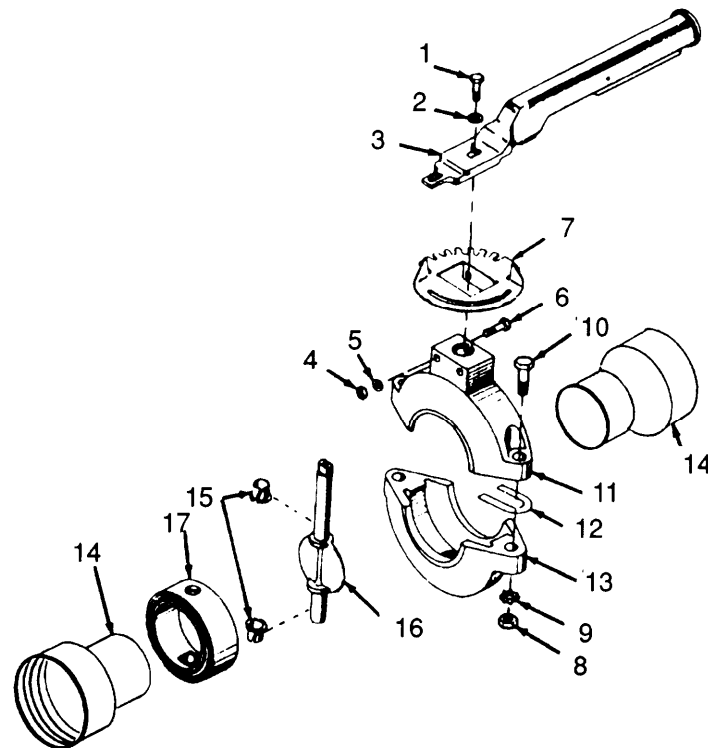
Butterfly Valve Assembly, Disassembly/Reassembly.
